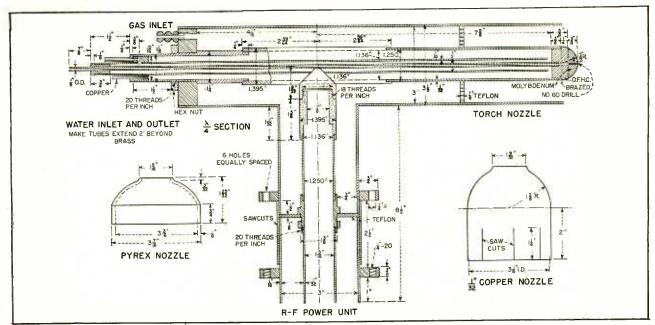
Working drawings of 5-kw electronic torch capable of providing temperature well over 3,000 degrees C
